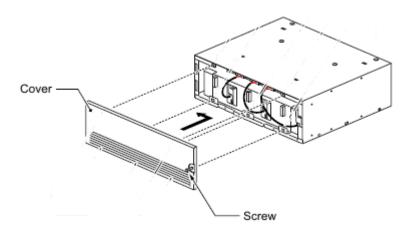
Install CHS LARGE BATT BOX Front Cover
